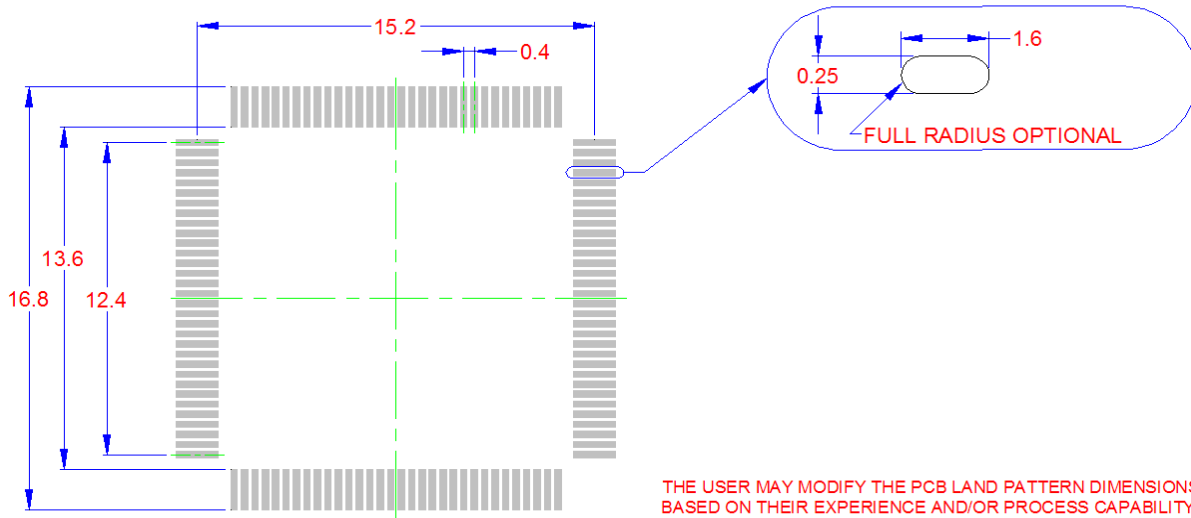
LAN9420/LAN9420i 128-VTQFP Package Definition
